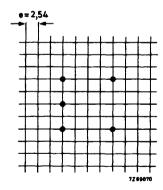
Hole pattern for mounting on a printed-wiring board, hole dia 1, 3 + 0, 1 mm
